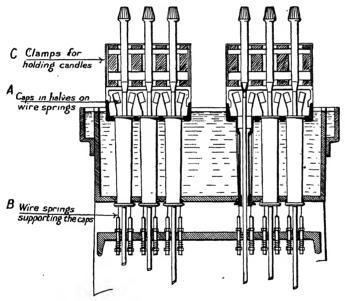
Durpitt's Machine for Moulding Candles with Self-fitting Ends. (By the courtesy of Price's Patent Candle Co.)
